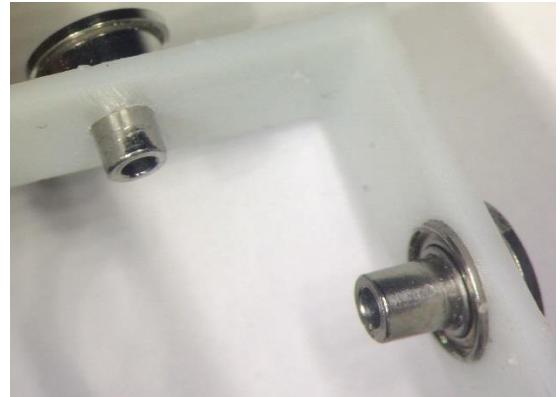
Gimbal square, showing bearings successfully fitting in two of the holes.
